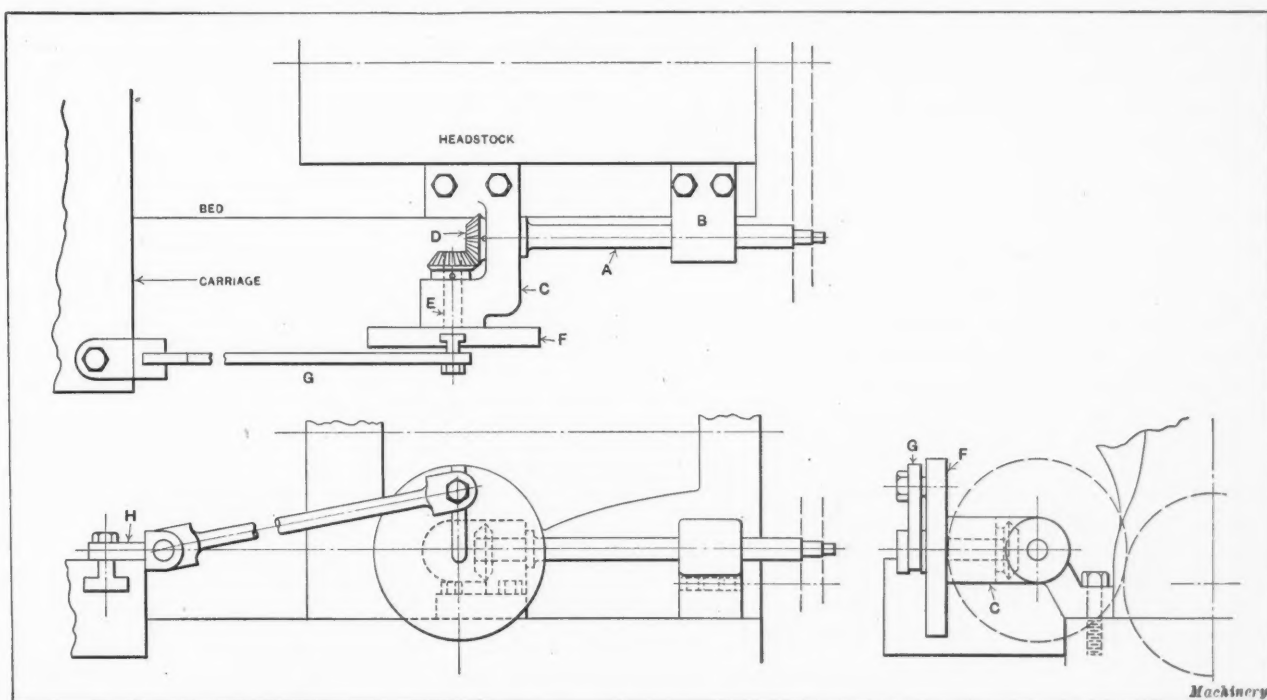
Lathe Attachment for cutting Oil-grooves on Internal and External Surfaces
